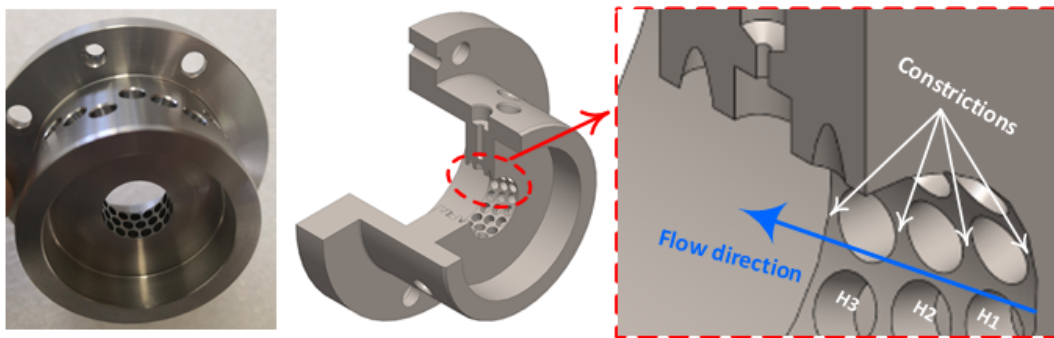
Photograph and cut-view of manufactured Hole Pattern Seal (HPS) used for testing
